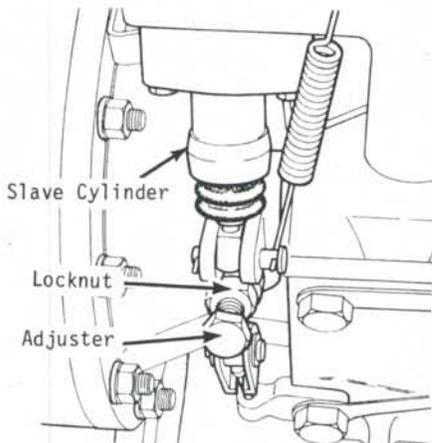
View of brake adjuster bolt on 1194, 1294 and 1394 models equipped with a cab.
